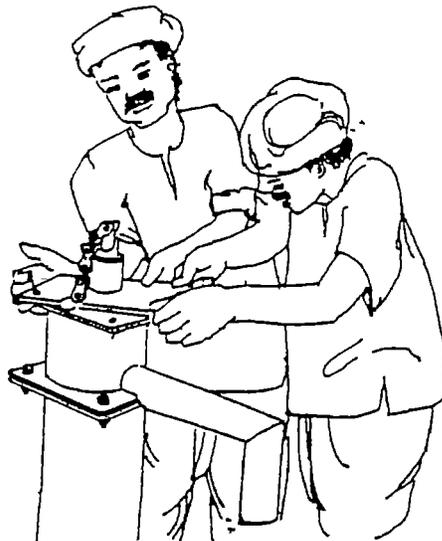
PUTTING MIDDLE FLANGE OVER WATER TANK
